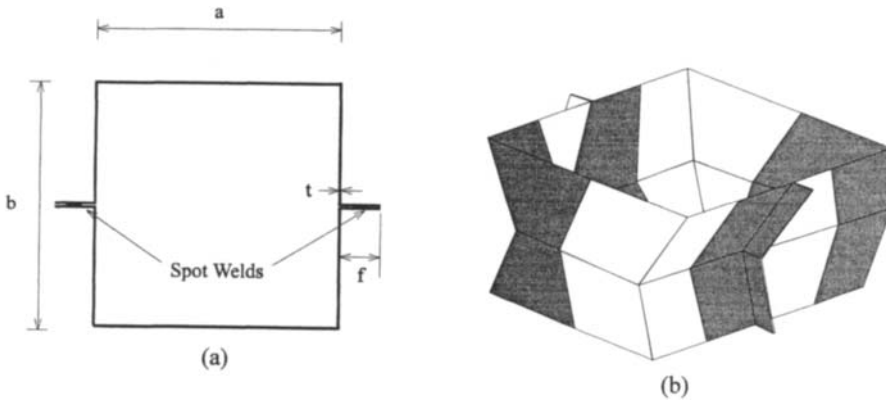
(a): Cross-section of double-hat section, (b): Eight asymmetric elements forming a collapse profile
